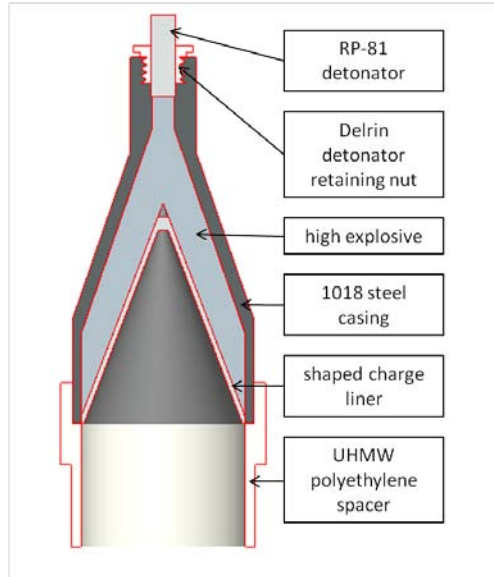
Charge assembly and components (1.998 in. liner design shown)
